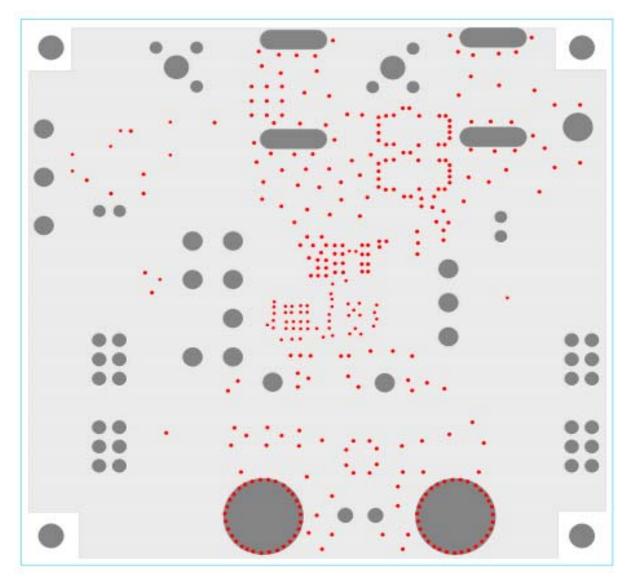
PCB - INNER LAYER 2 (TOP VIEW)
